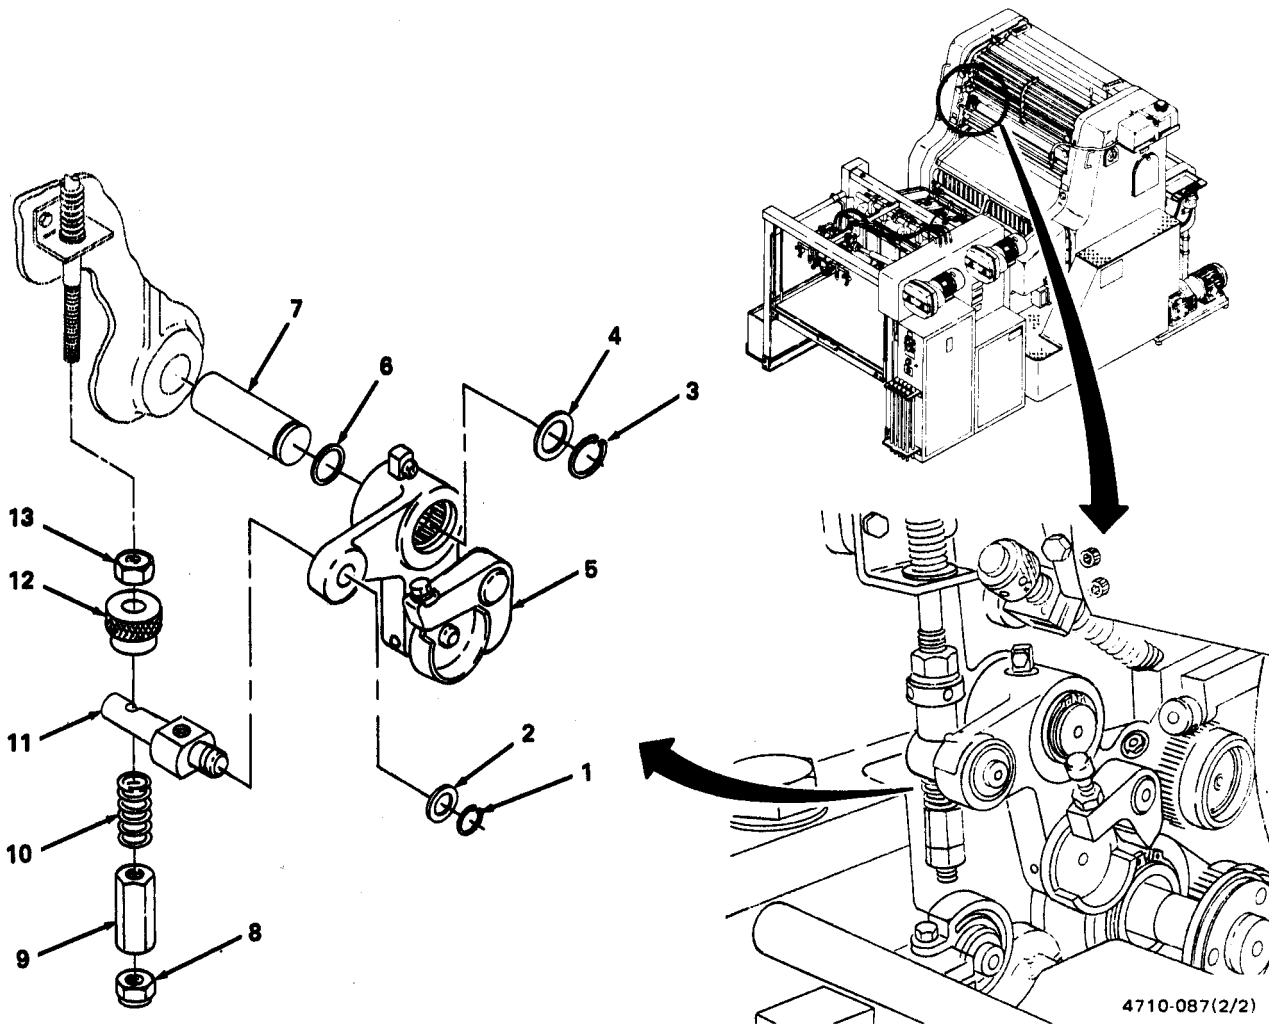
Vibrator Roller and Bearing Assembly Removal (O/S).
